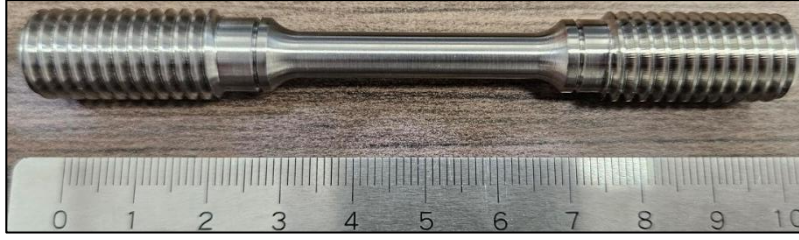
Machined specimen geometry used for creep testing and elevated temperature tensile testing.
